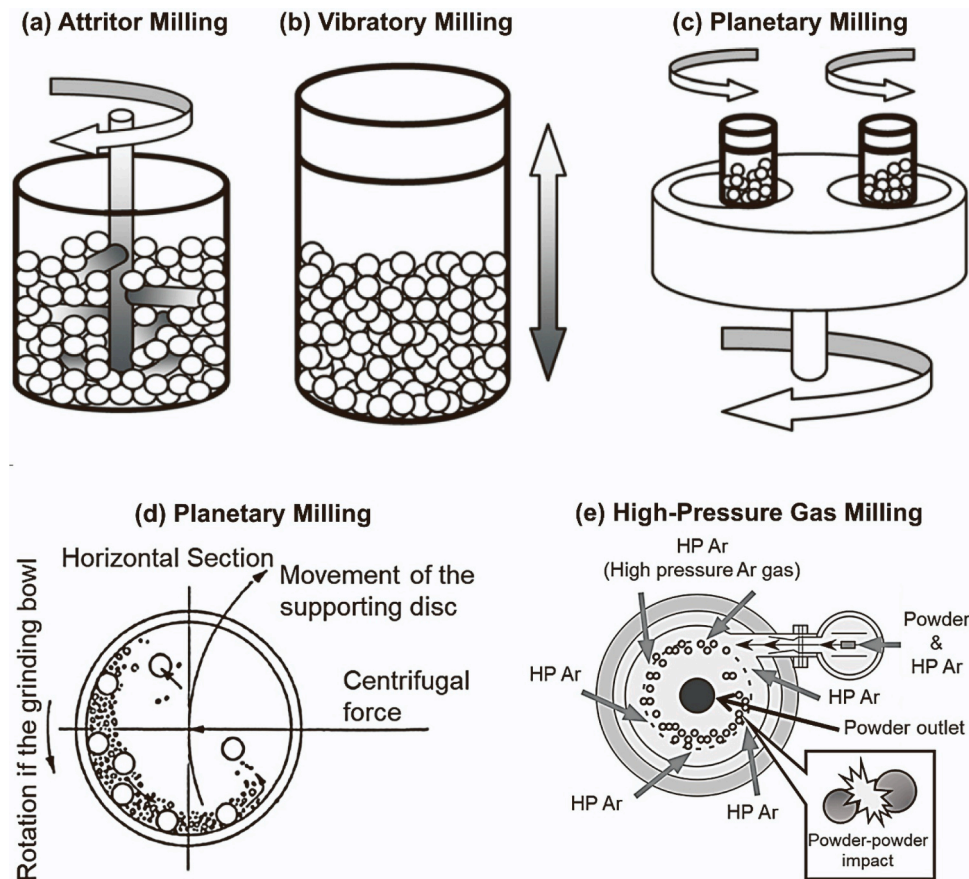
Various types of high-energy ball milling for powder-SPD: (a) attritor milling, (b) vibratory milling, (c,d) planetary milling and (e) high-pressure gas milling [43, 151, 153].
